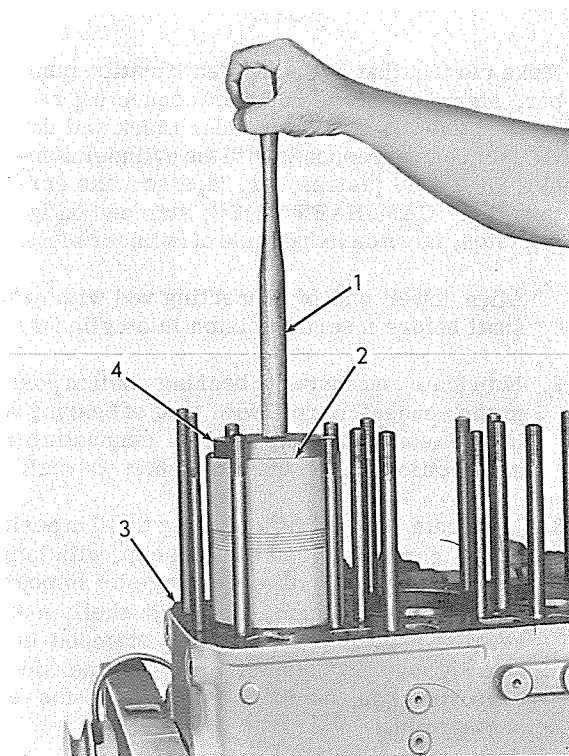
Installing Piston Assembly In Cylinder Sleeve (T-20225)
